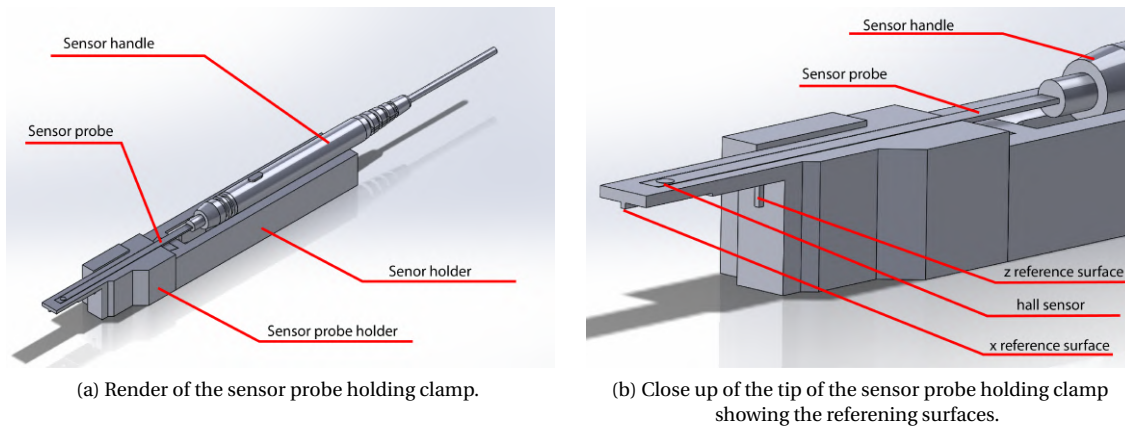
Renders of the parts holding the sensor clamp in place.
